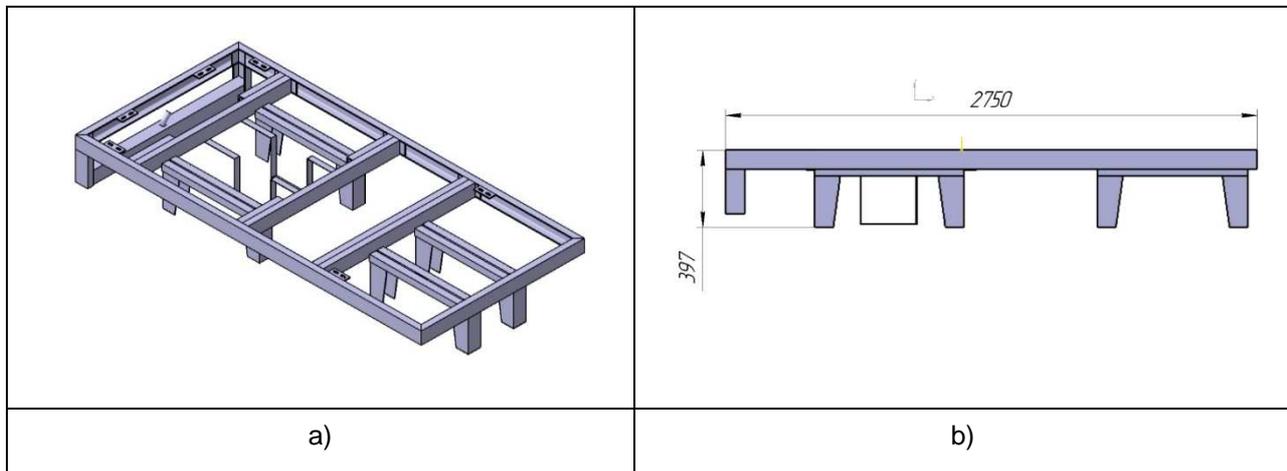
UMTET ladder load-bearing system a) geometric model b) overall dimensions
